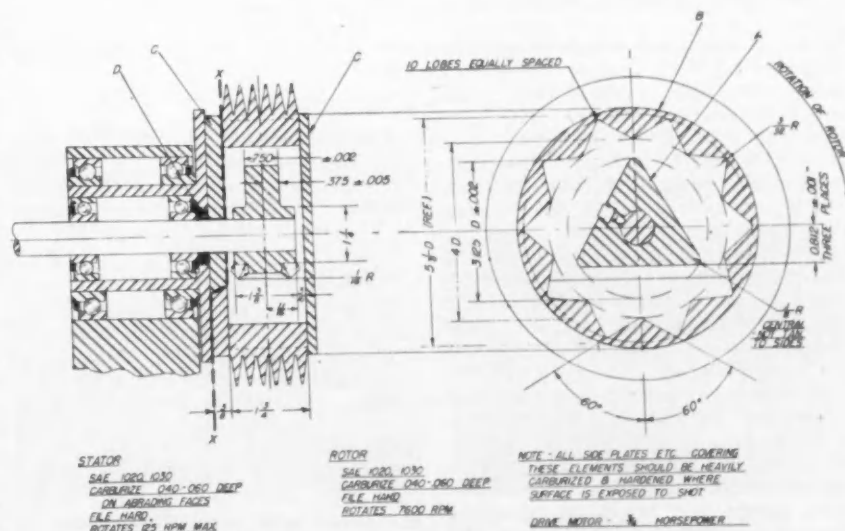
Essential dimensions of M-C shot fatigue testing apparatus
